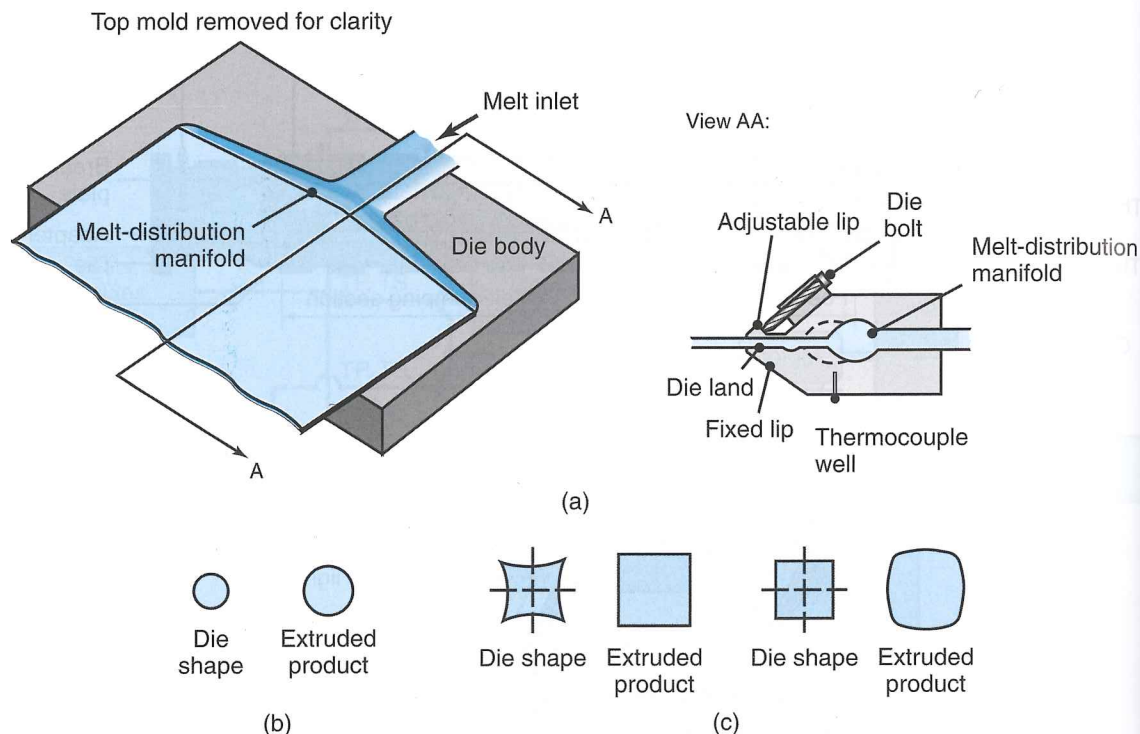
Common extrusion die geometries: (a) coat-hanger die for extruding sheet; (b) round die for producing rods; and (c) and (d) nonuniform recovery of the part after it exits the die.
